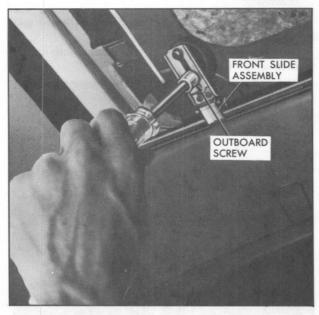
Removing Outboard Screw From Front Slide Assembly
